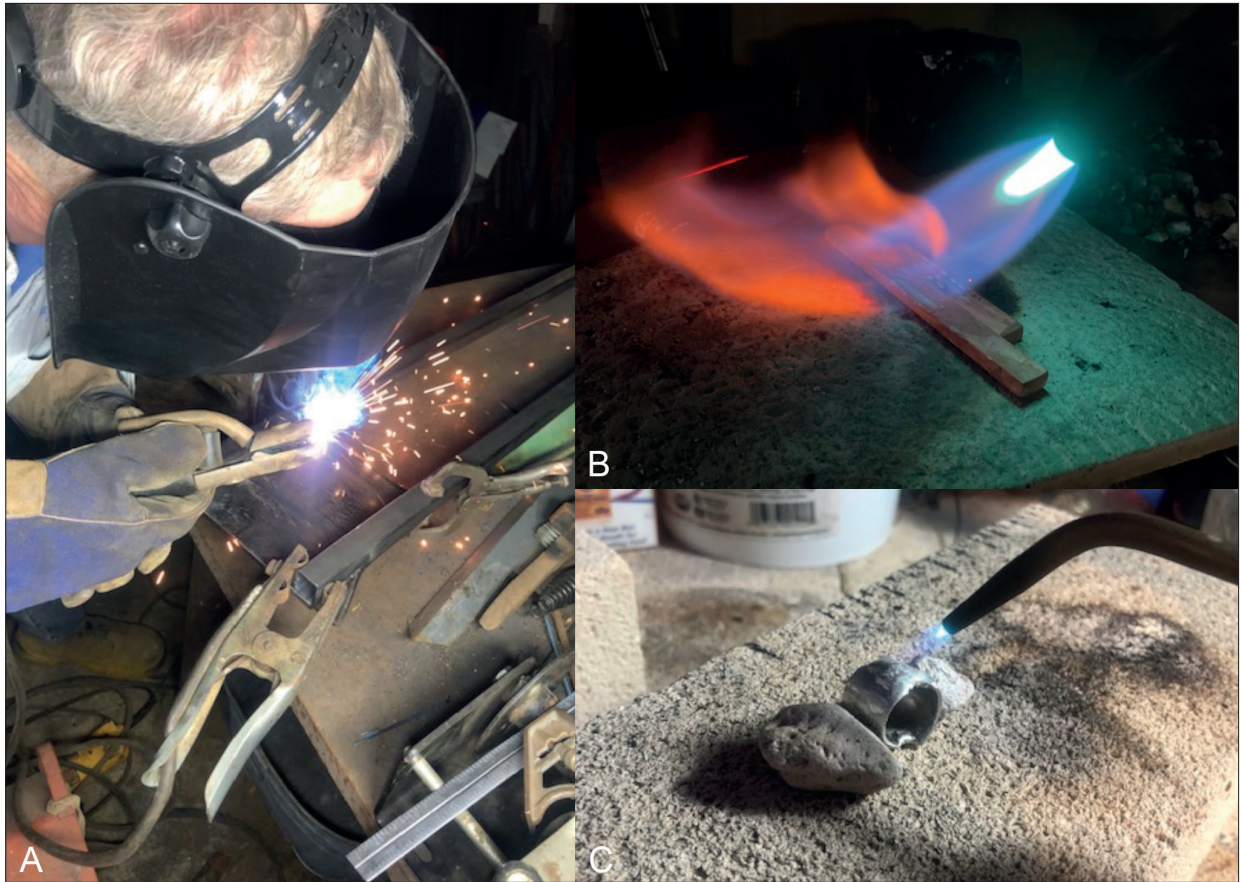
A – Kent Heimer welding with an arc welder; B – brazing a piece of brass (note flame size); C – welding a piece of pewter with (a relatively cooler) tiny flame (photo by Kent Heimer/Dawn Hoffmann).
